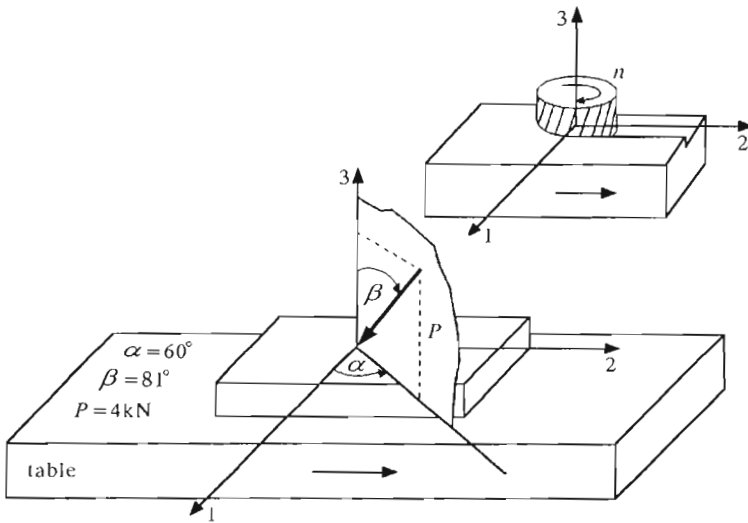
Taken in dynamic tests on milling machine variant of reciprocal motion of cutting tool and workpiece
